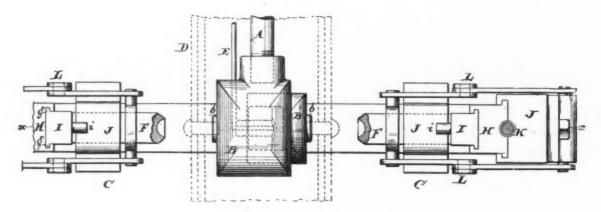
Enlarged View of Right-Hand End of Fig. 2.
